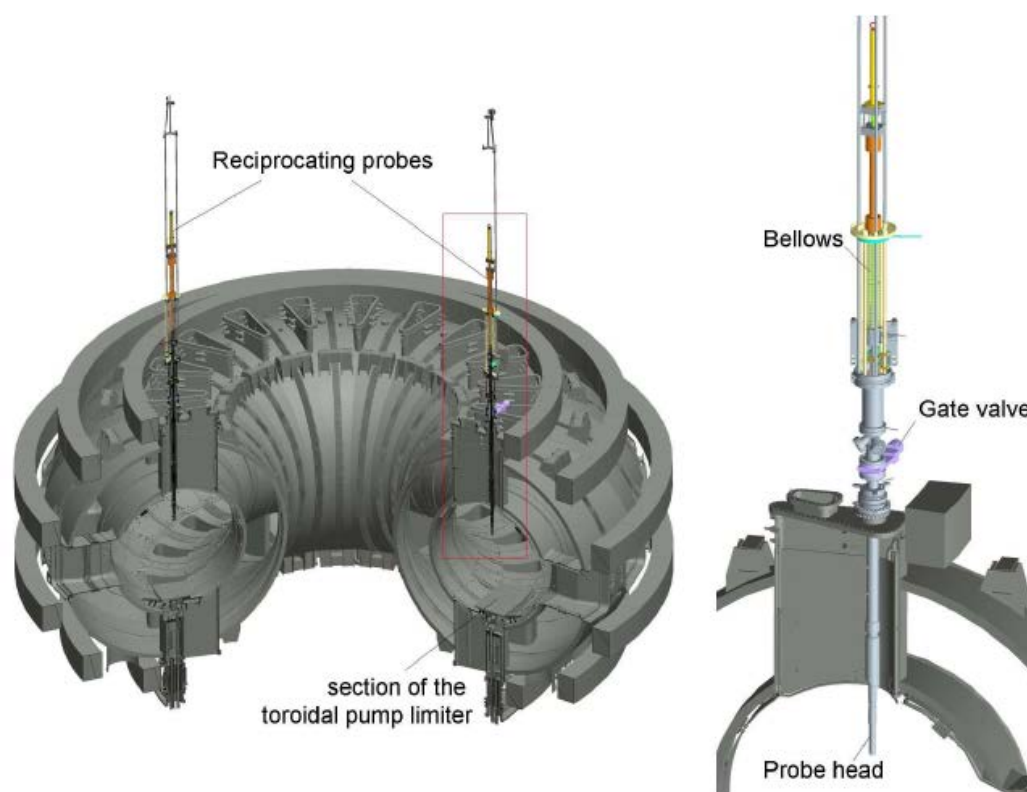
Drawing of the Tore Supra chamber and magnetic coils system with locations of two reciprocating probe drives.
